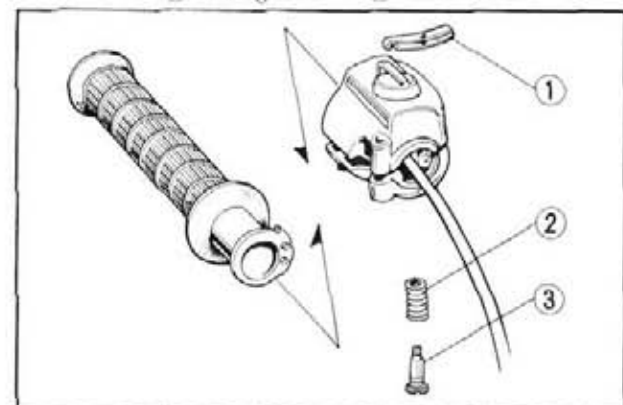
① Throttle grip adjuster ② Spring ③ Adjusting bolt
